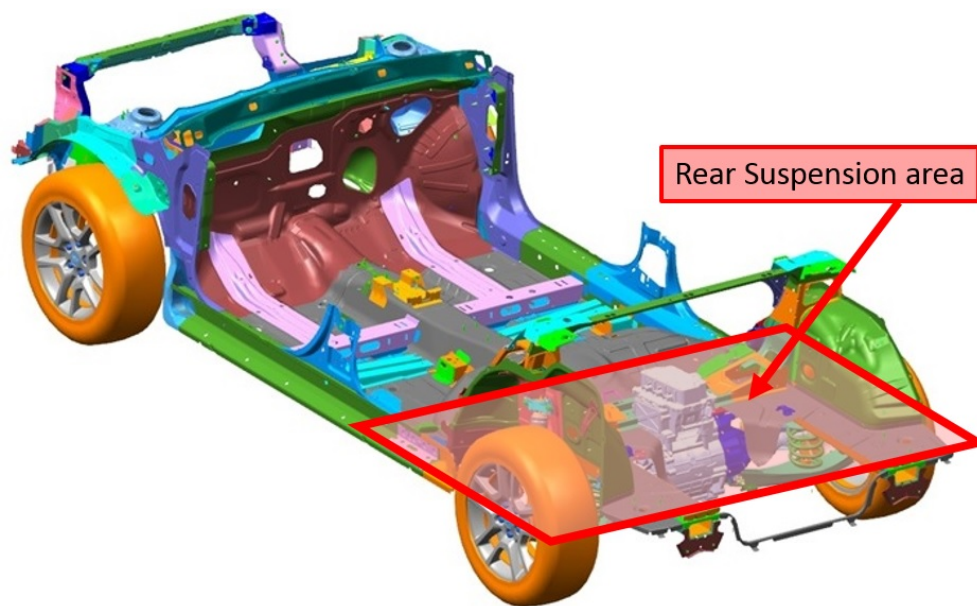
Lower Structure of Malibu with motor in place - Rear isometric view.
